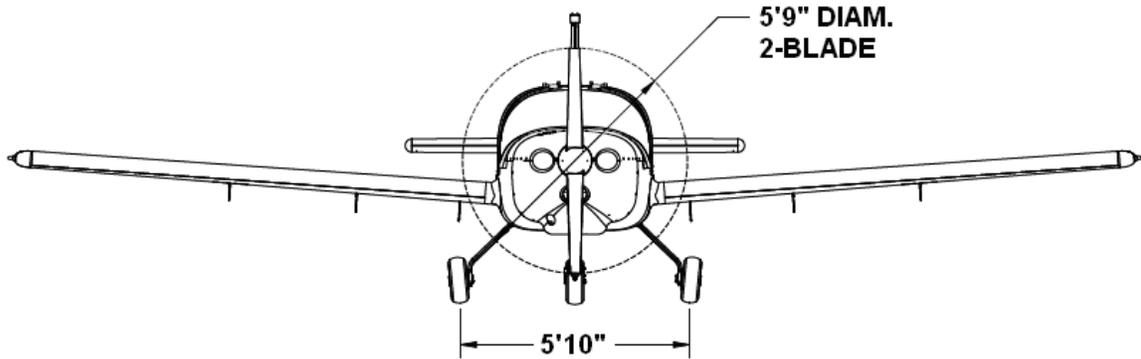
(Reference Only) Front View of Airplane Dimensions
